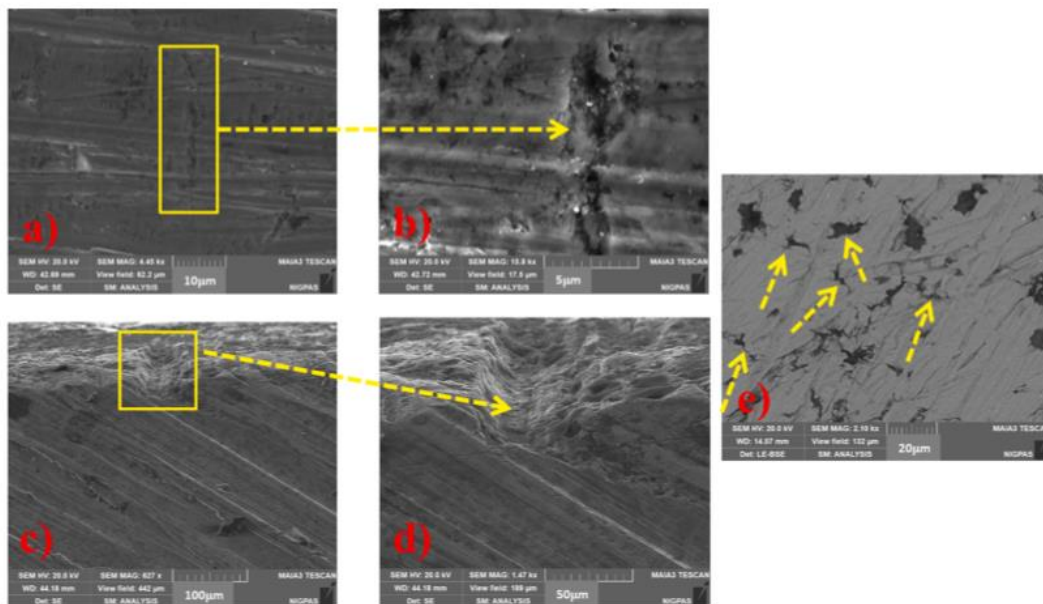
Mechanical crack formed on the H21 steel during hot forging process in the inner corner radius (a) after about 2400 forging cycle (b) crack 's close – up indicated in (a), (c) after about 4200 forging cycles, (d) crack 's close –up indicated in (c) and (e) dispersion of cracks after about 5 200 forging cycles on the surface of the die. (Emamverdian, et al., 2021).
